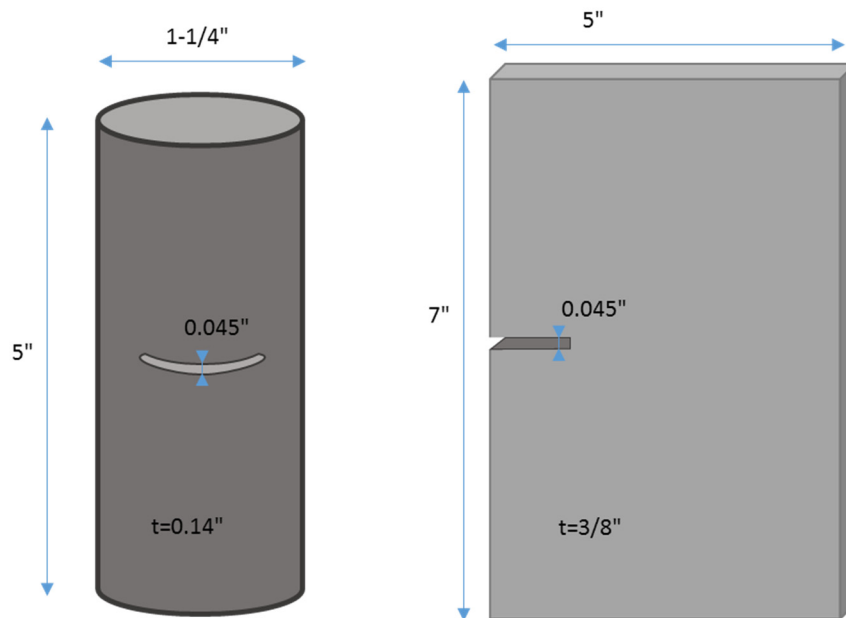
Tube and Plate specimen dimensions as modeled within Abaqus Cae
